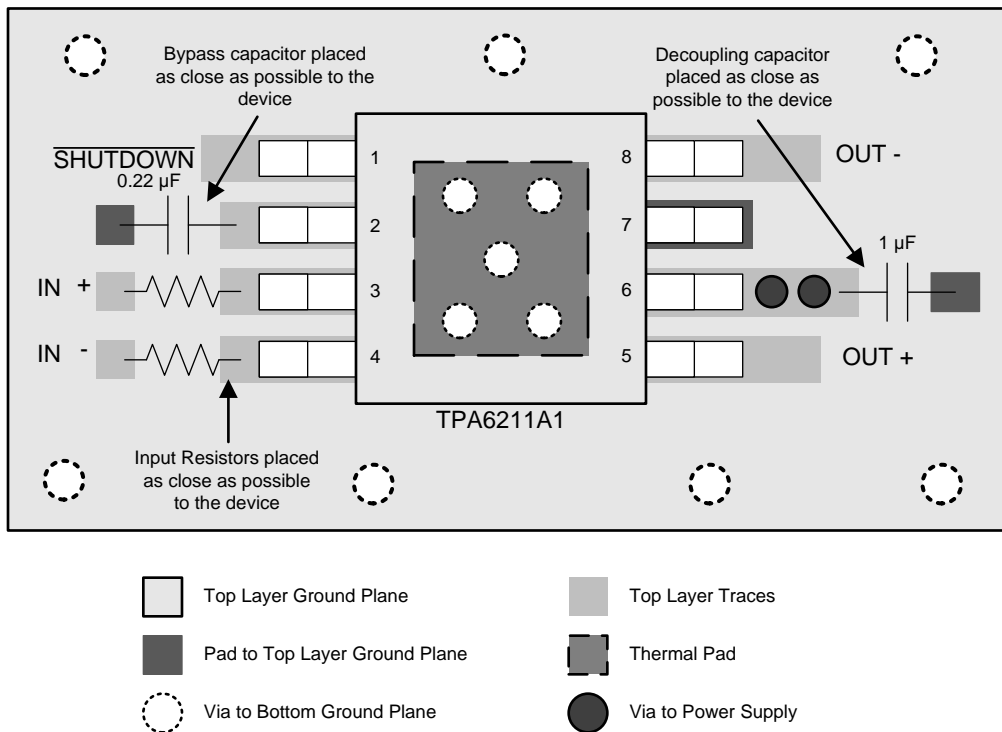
TPA6211A1 8-Pin SON (DRB) Board Layout
